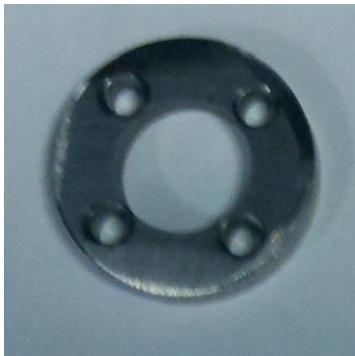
Image of the “Shaft Bolt Plate” collet with hole pattern (post-machining)
